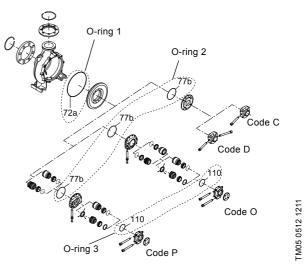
Static pump O-rings for seal arrangement "C, D, O and P'
